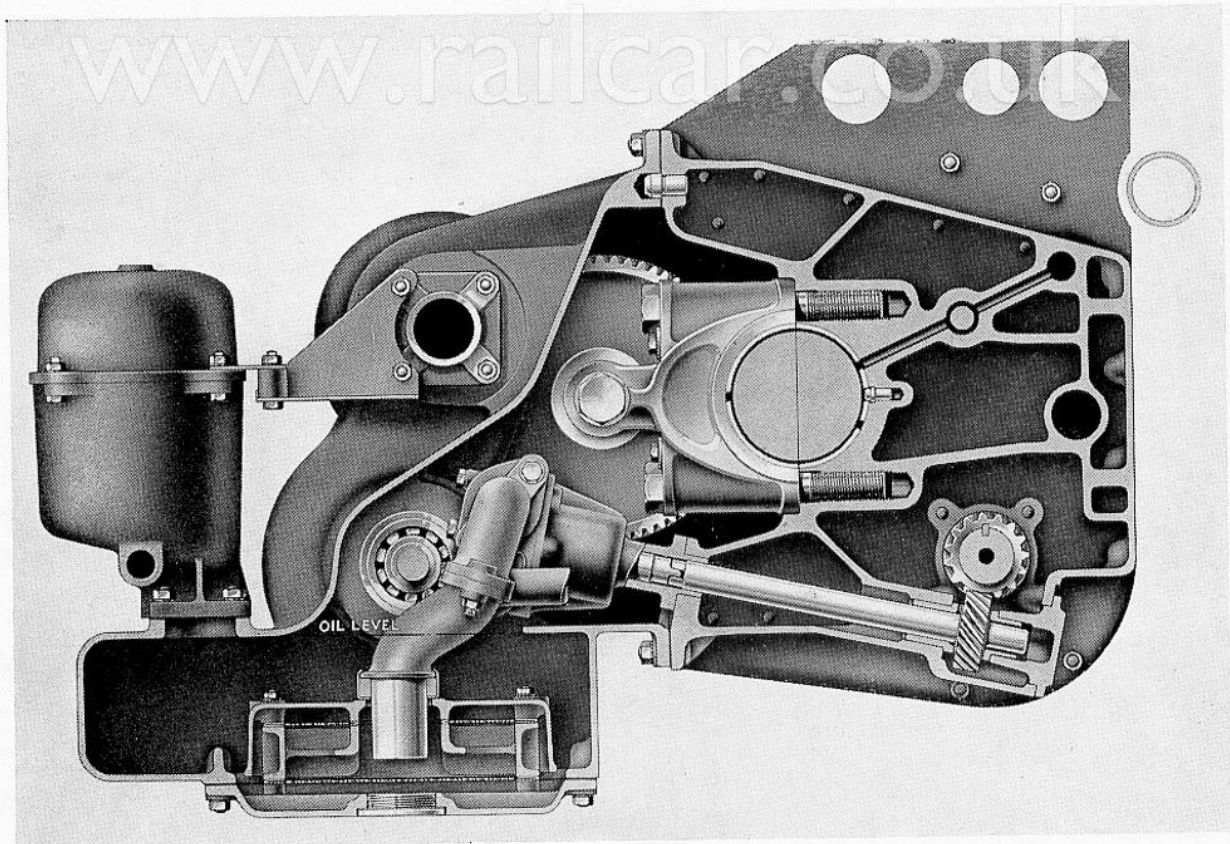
VIEW THROUGH HORIZONTAL ENGINE SHOWING SUMP FILTER, SUCTION PIPE AND MAIN OIL PUMP DRIVE
